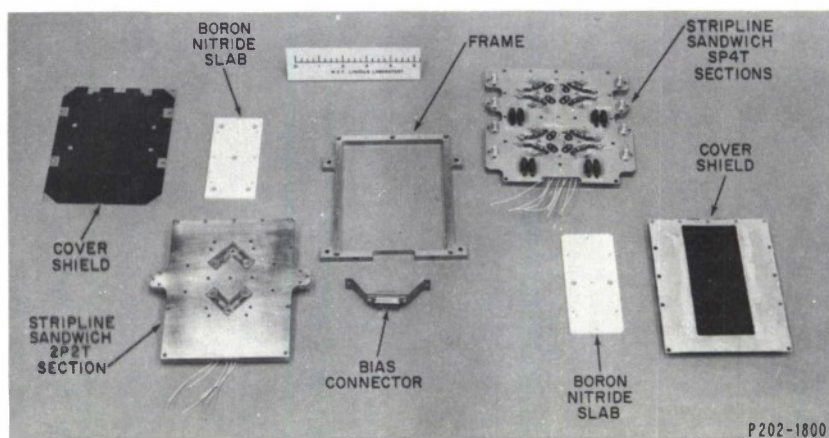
Completed stripline sandwiches and remaining parts needed for full switch assembly.
